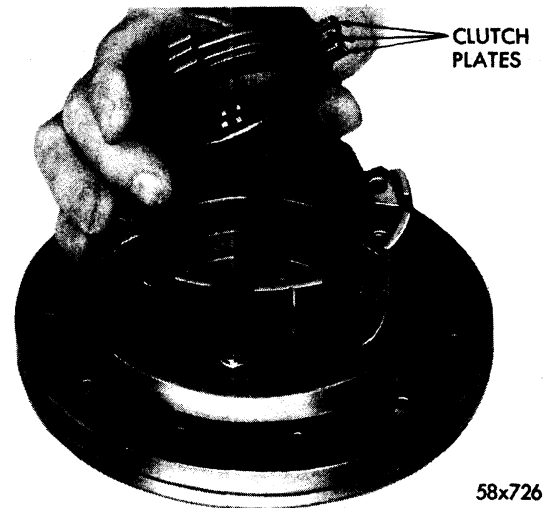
Removing or Installing Clutch Plates from Differential Case
